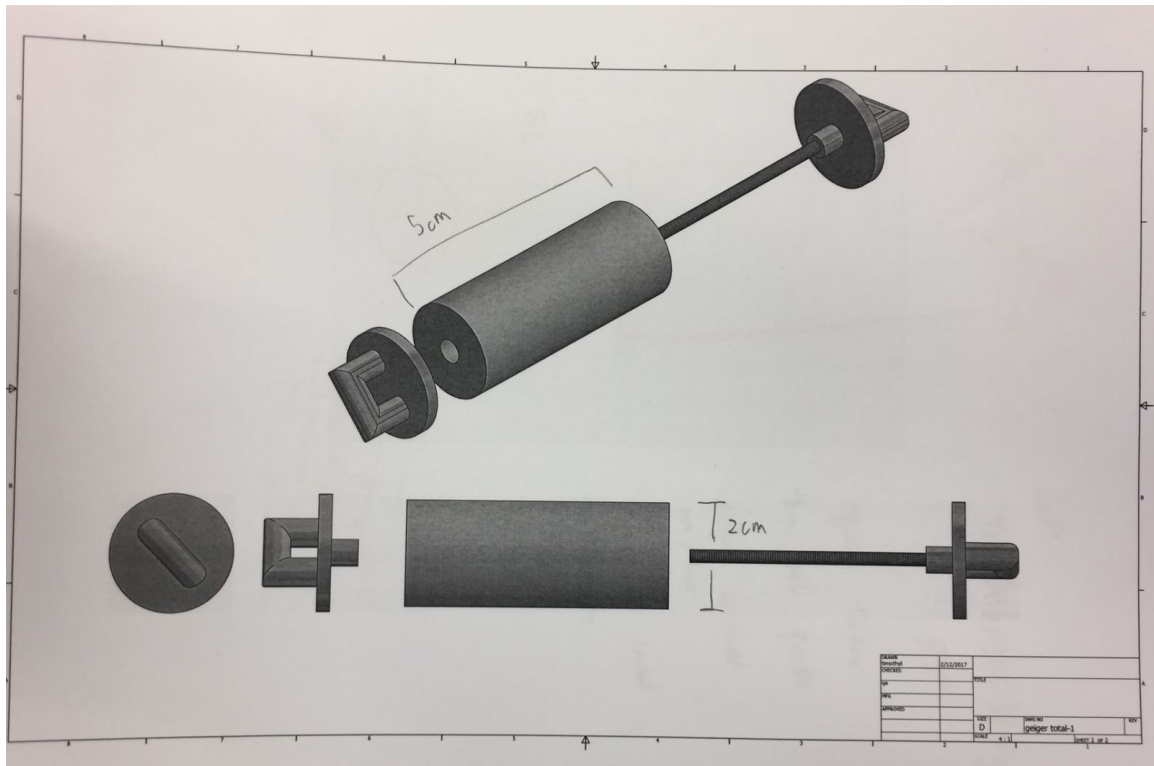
CAD Extruded Drawing of Hydroscopic Sensor
